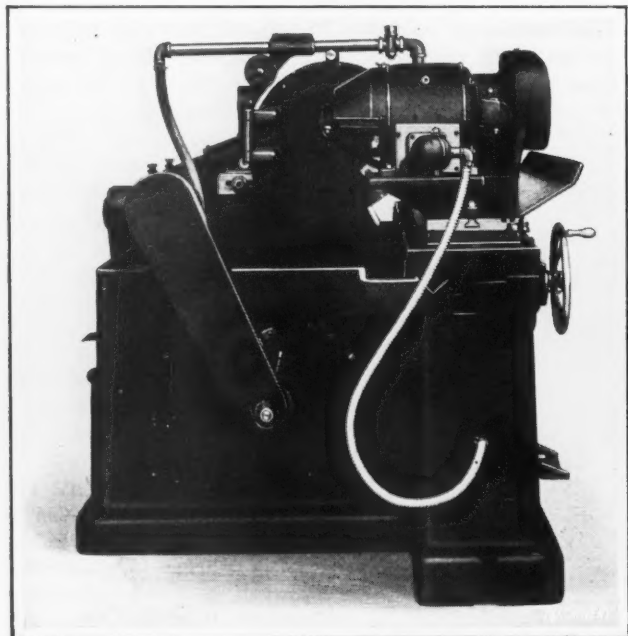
Left-hand End of the Machine, showing Headstock Motor which revolves the Work
